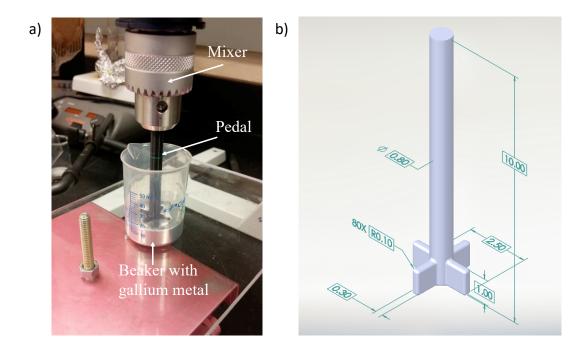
Setup for preparation of gallium metal foam: (a) mixing arrangement of liquid metal, (b) isometric view of the impeller used for mixing gallium (all the dimensions are in cm). Note that all edges on the cross-shaped impeller have fillets of 0.10 cm radius.
